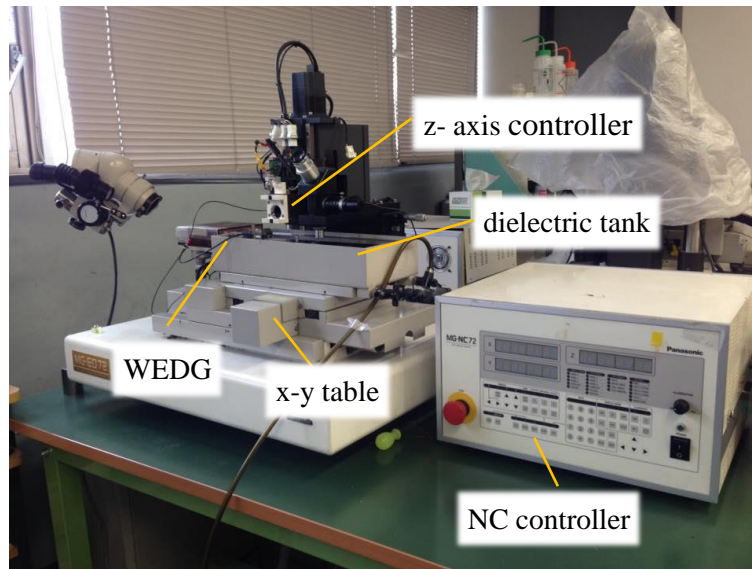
Panasonic (MG-ED72) micro EDM machine
